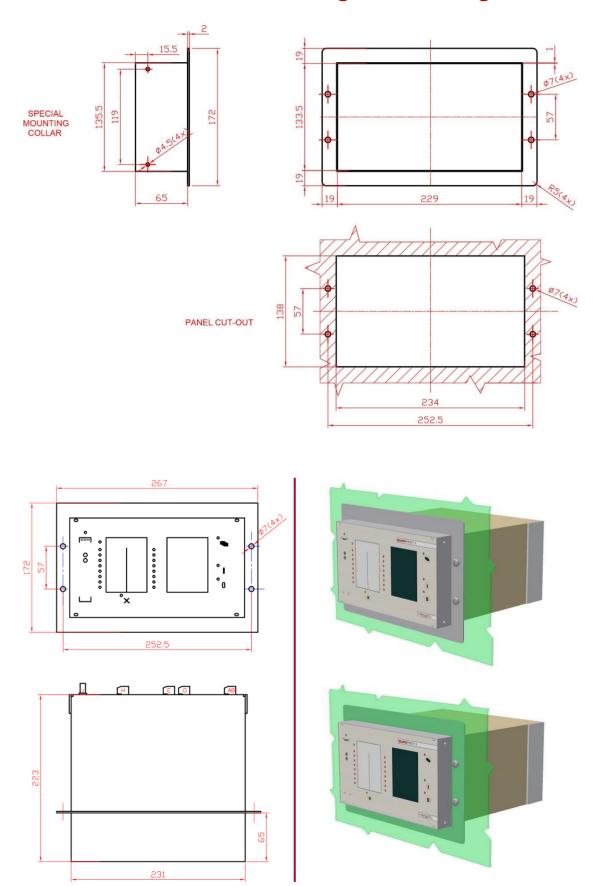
Dimensions for semi-flush mounting of 42 HP single rack with 3D illustration
